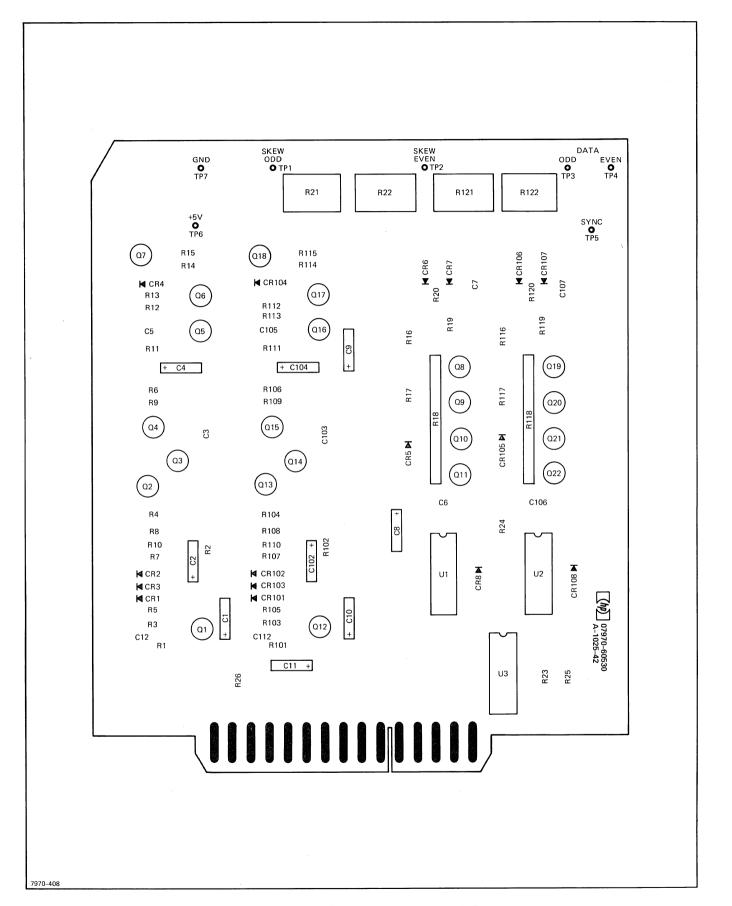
Dual-Channel Read Data PC Assembly (21 - 45 ips), Parts Location Diagram
